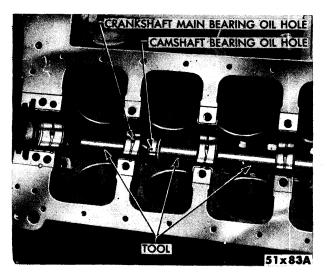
Installing Camshaft Bearing Shells (Tool C-3034)
